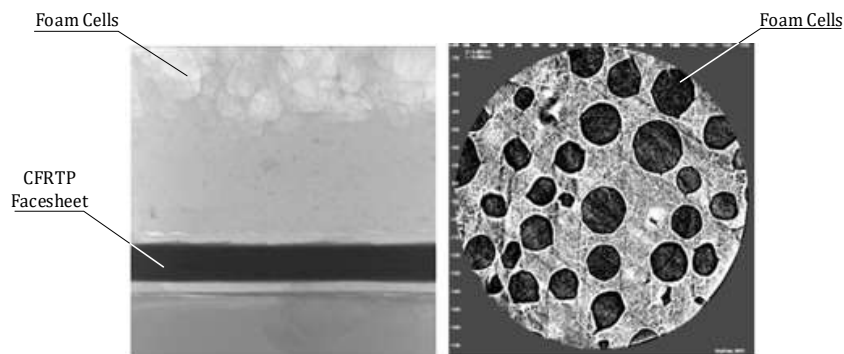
μ CT scans of in-situ CF RTP sandwich structures with foam cores: projection image (left) and reconstructed sectional image (right) [189].
